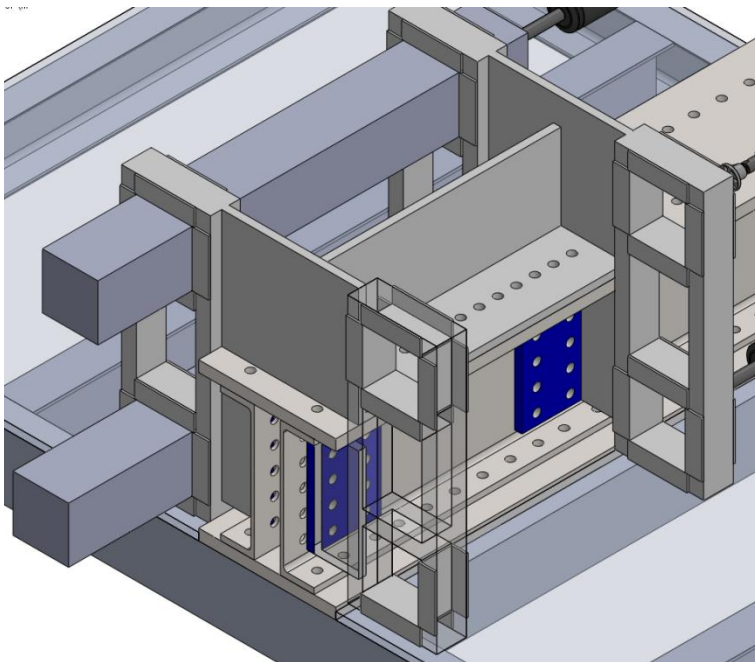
3D MODEL ILLUSTRATING THE BOTTOM CONNECTING PLATE OF THE QUADRO-CAGE-CLAMP.
